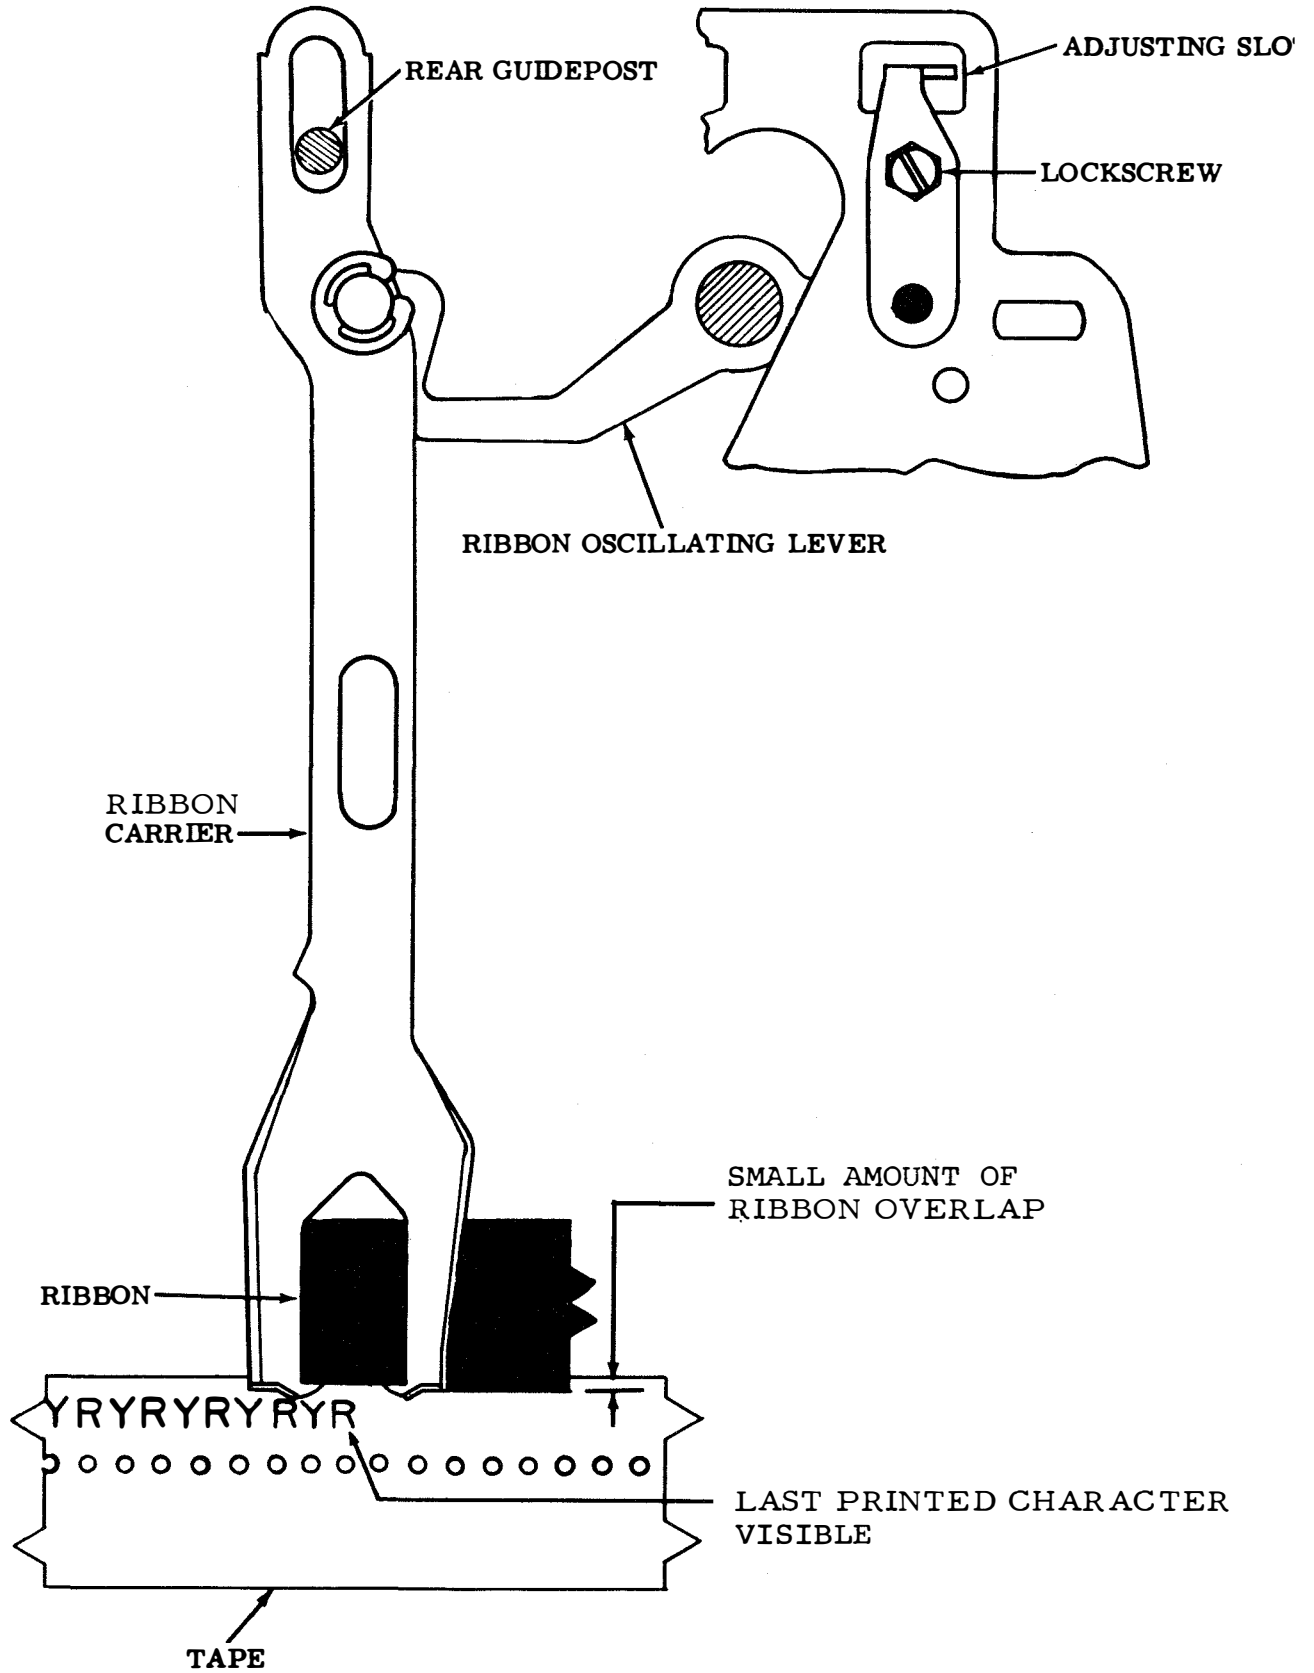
Ribbon Carrier (For Chadless Tape), Top View
